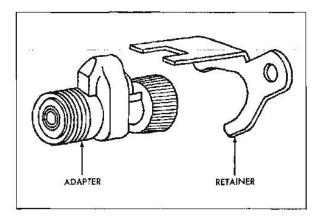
B-41 Speedometer Driven Gear Adapter and Retainer - Trailer Provision
